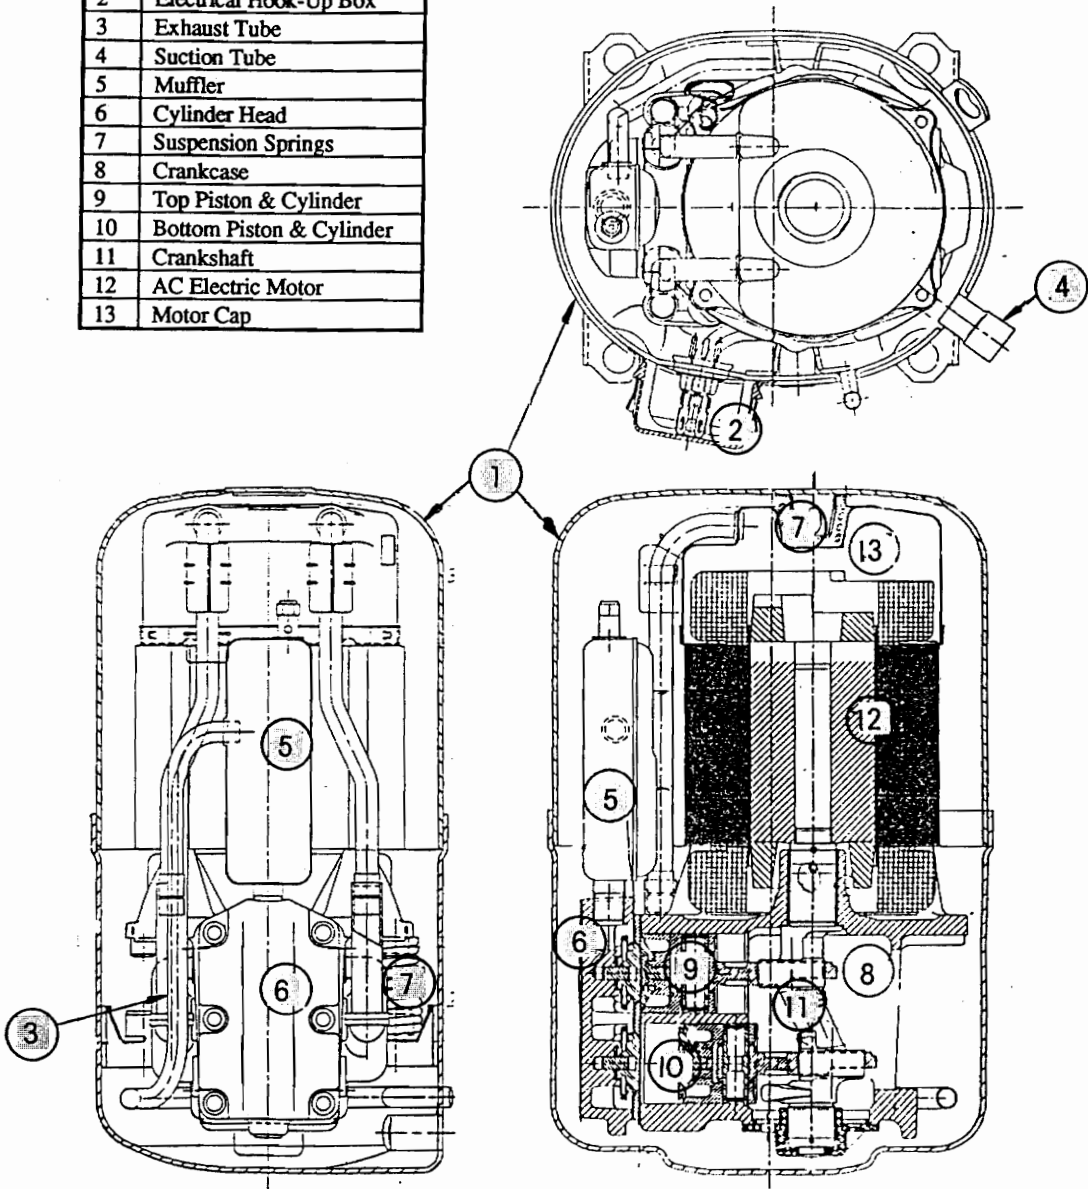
Internal Components of the Bristol H25A Compressor
